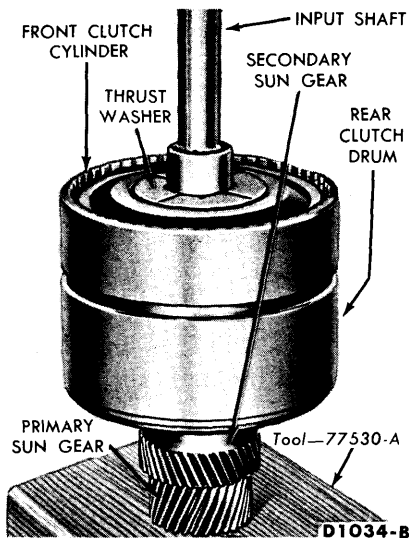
Input Shaft and Clutch Mounted in Holding Fixture
